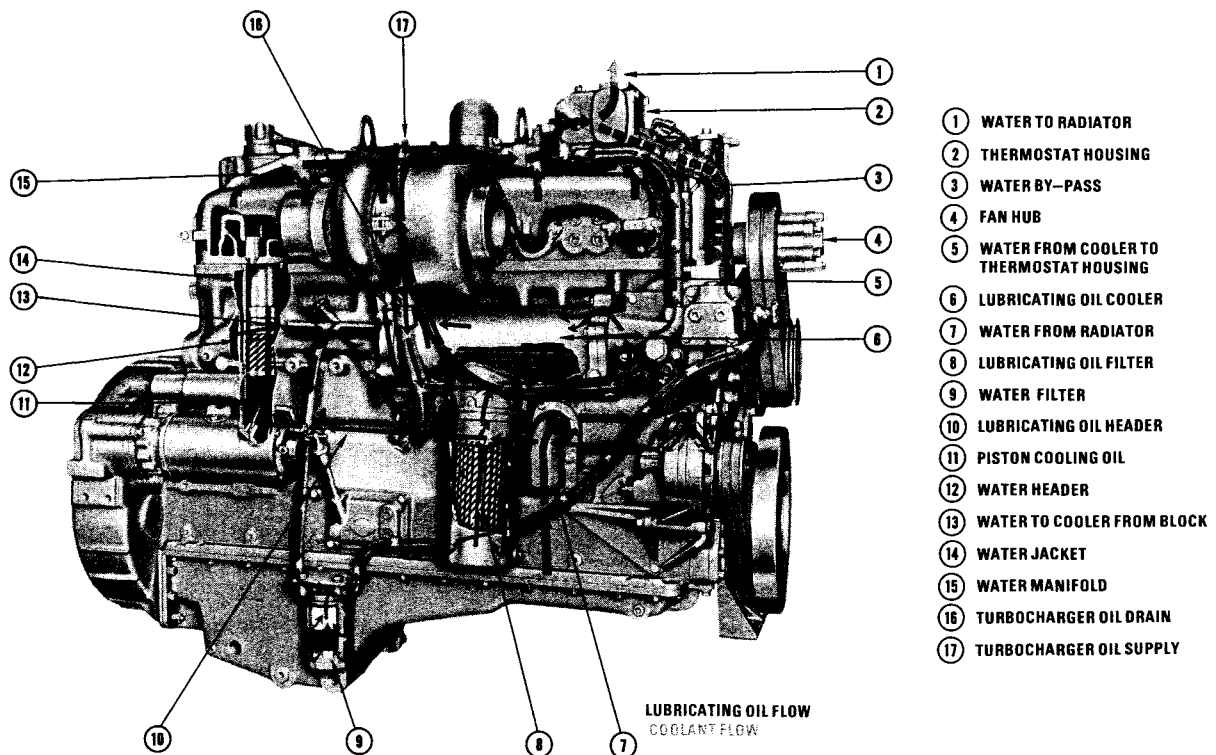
, (LWC-18). Lubricating oil and coolant flow - Inline Engine
